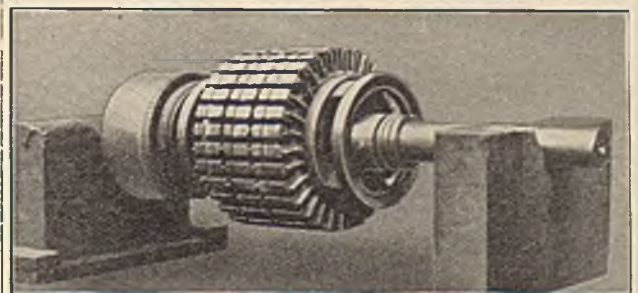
Armature Core with Distance Pieces welded into position.
